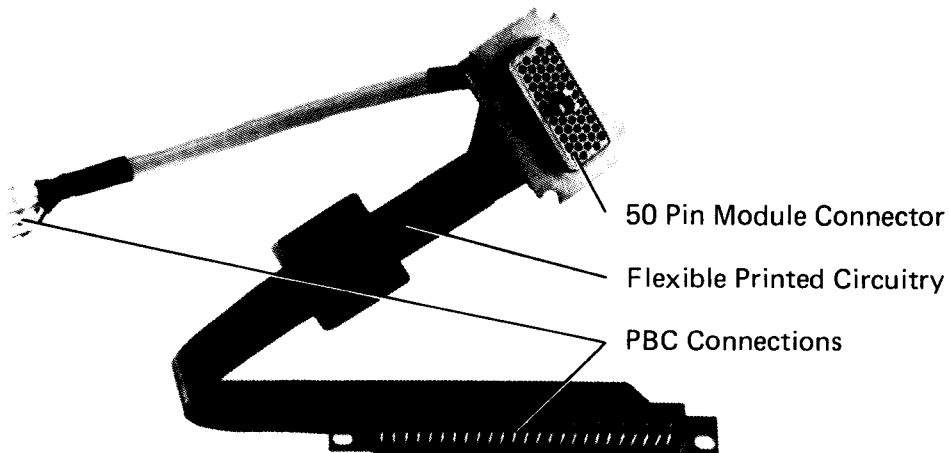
Assembled 50-pin Module Connector (HP Part Number 70000-60001)
